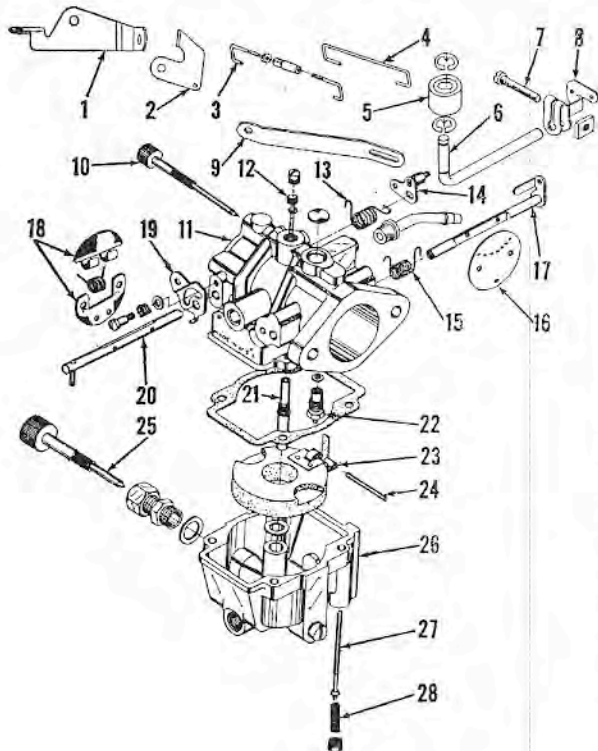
Exploded view of Tillotson model OM carburetor.
